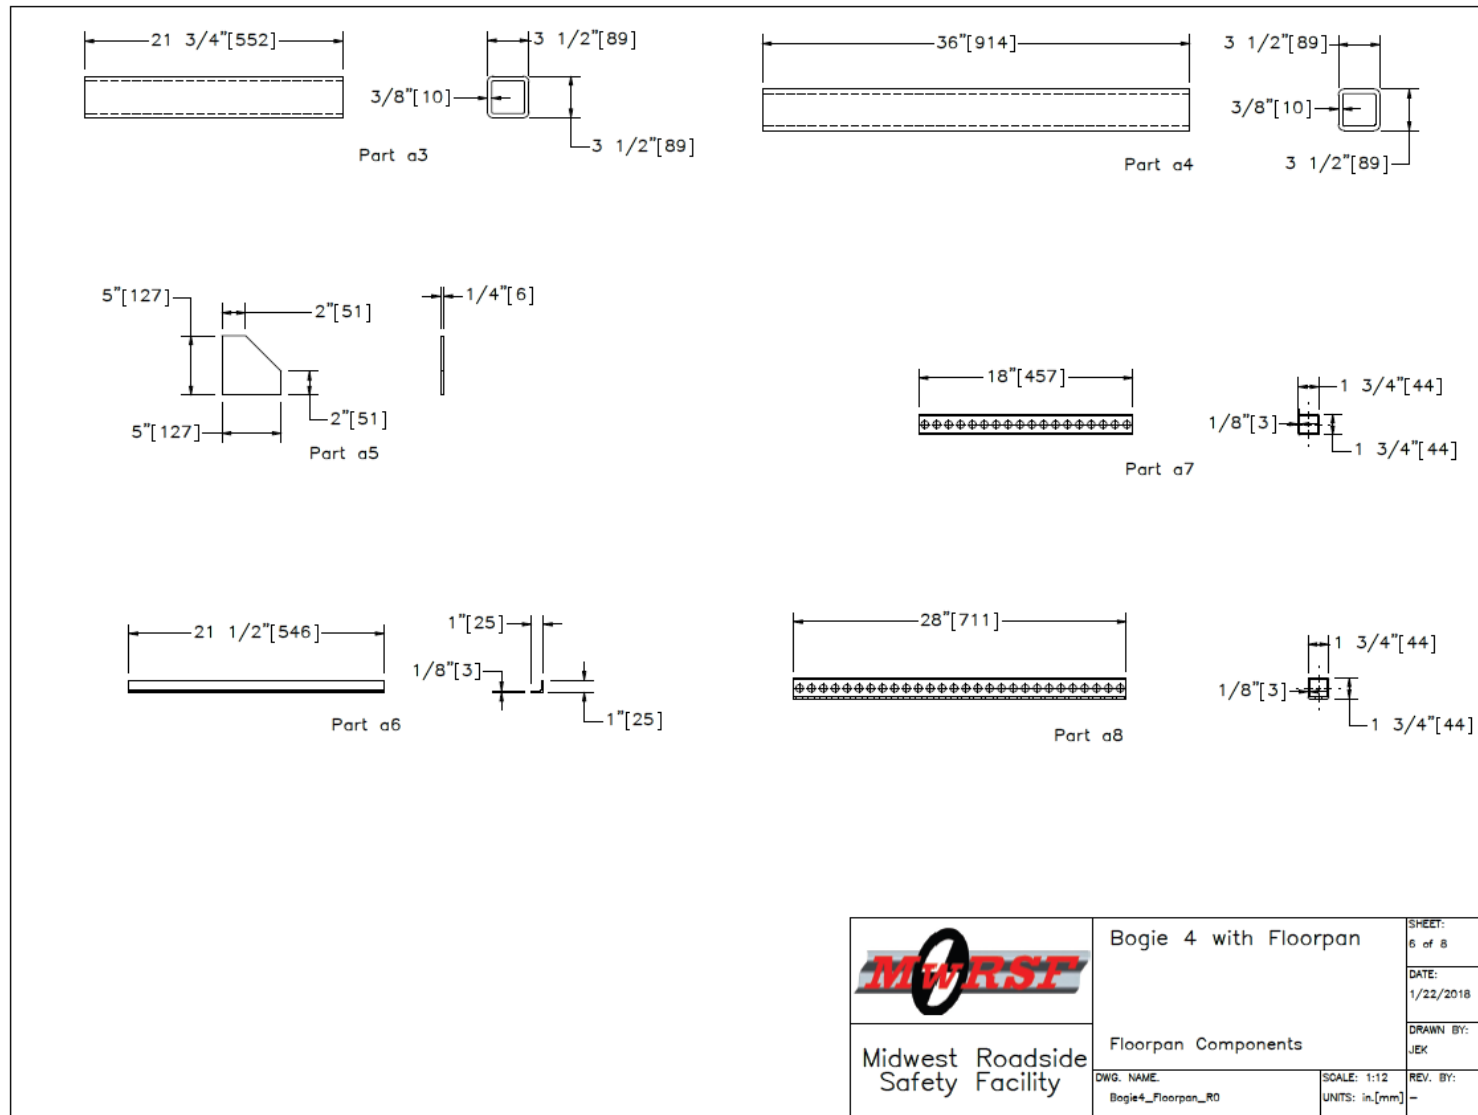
Floor Pan Components, Test Nos. MWPFP-22 through MWPFP-26
